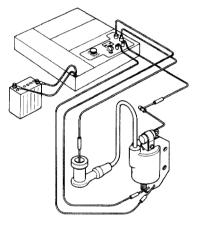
Generator/Ignition System Disassembly/Reassembly
